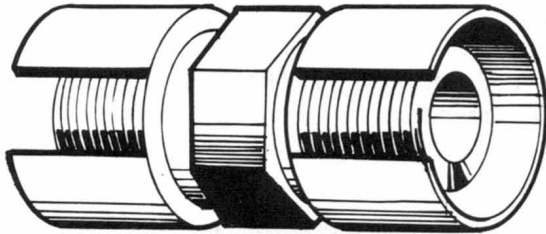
A partially cutaway sleeve indexed coupling which shows the common threading. Only like sleeve-indexed hoses can be joined with this coupling.
